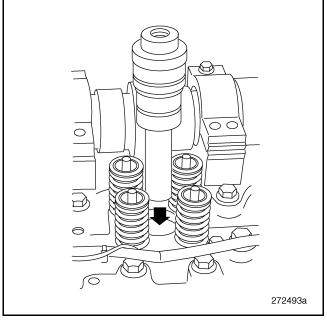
Installing Injector Bore Sealing Plug, 9998251
